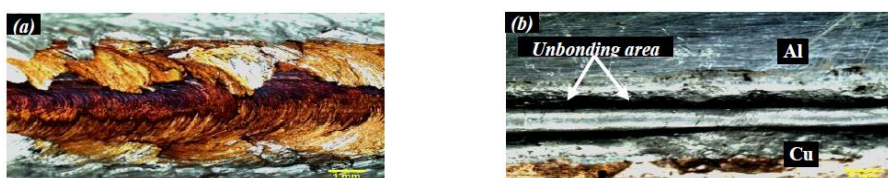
Optical macrograph of dissimilar aluminium and copper joint, FSW at a rotational speed of 2000; (a) Top view and (b) Bottom view.
